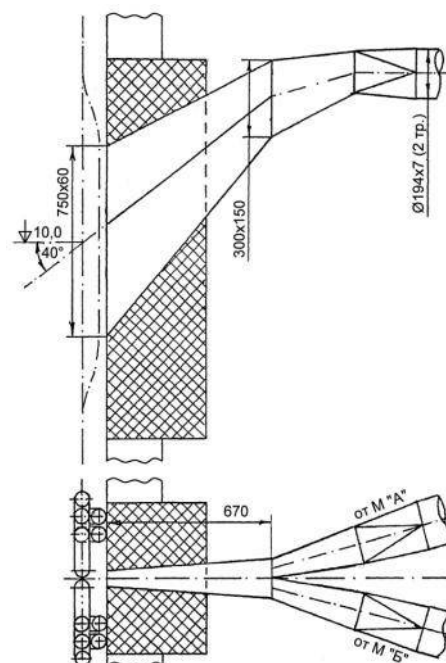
Key layout of coal dust straight-flow burner at the boiler №1.
